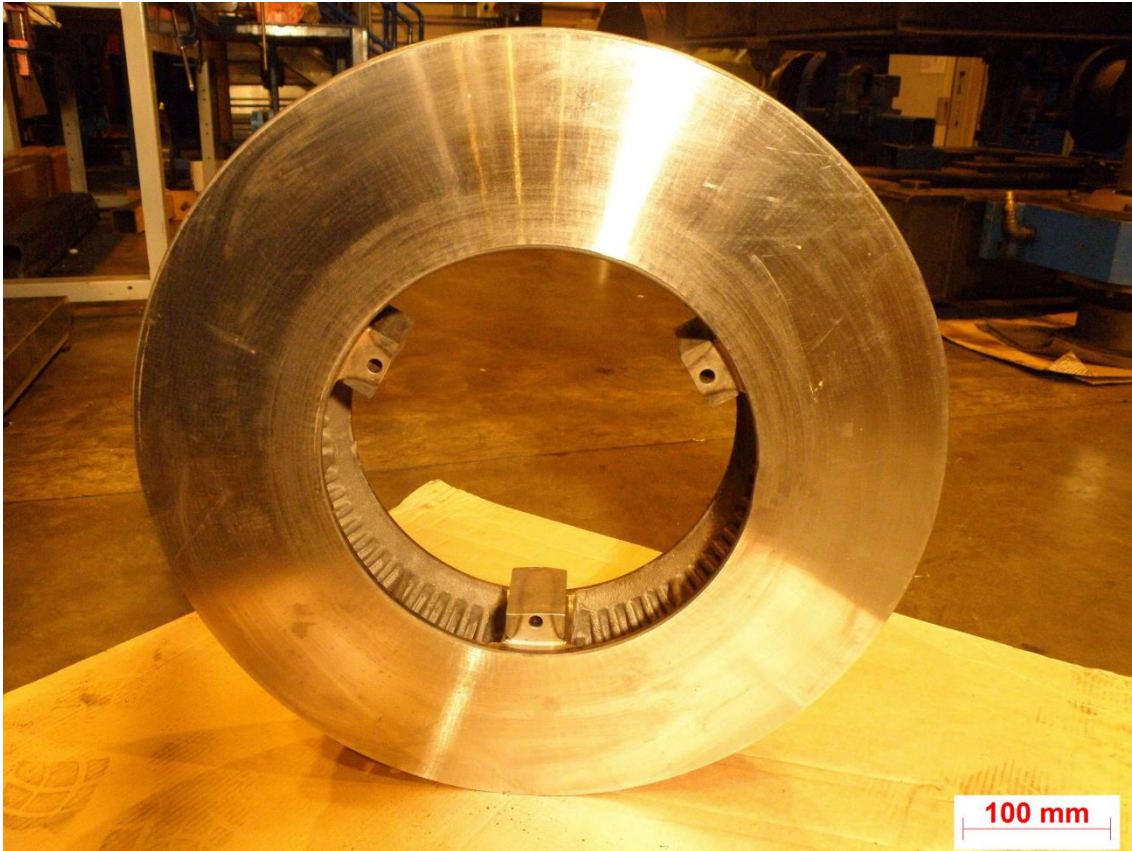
Clad brake disc with 640 mm outer diameter after diamond grinding
